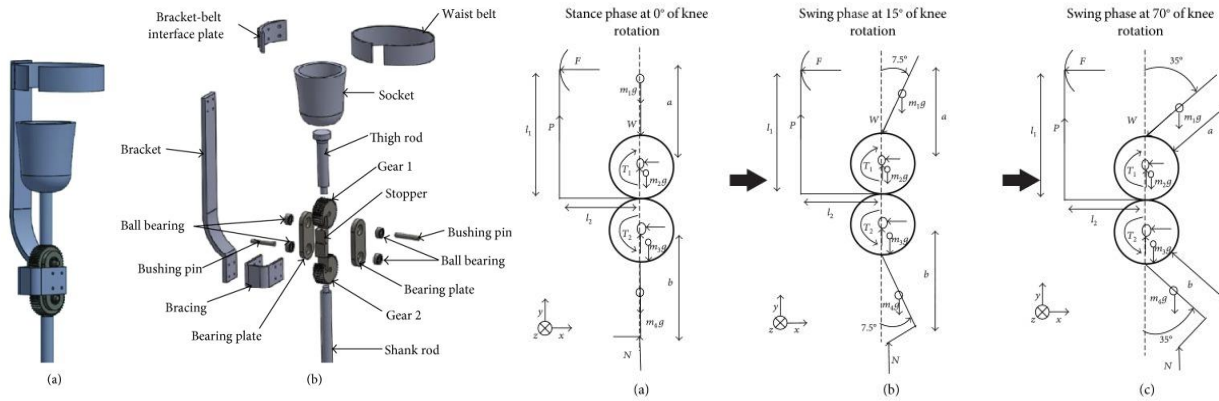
Isometric and exploded view of lower-limb prosthesis using a gearing mechanism
